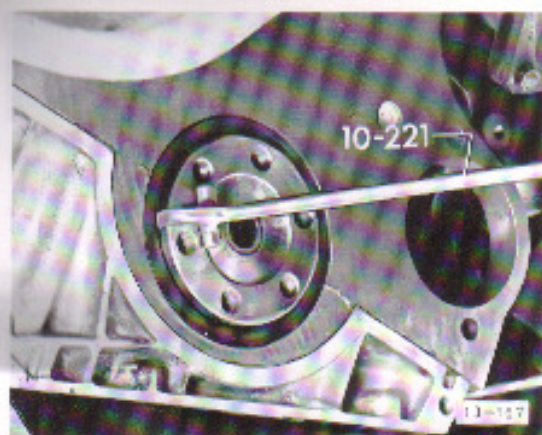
Removing crankshaft oil seal, flywheel end (or 2086)
